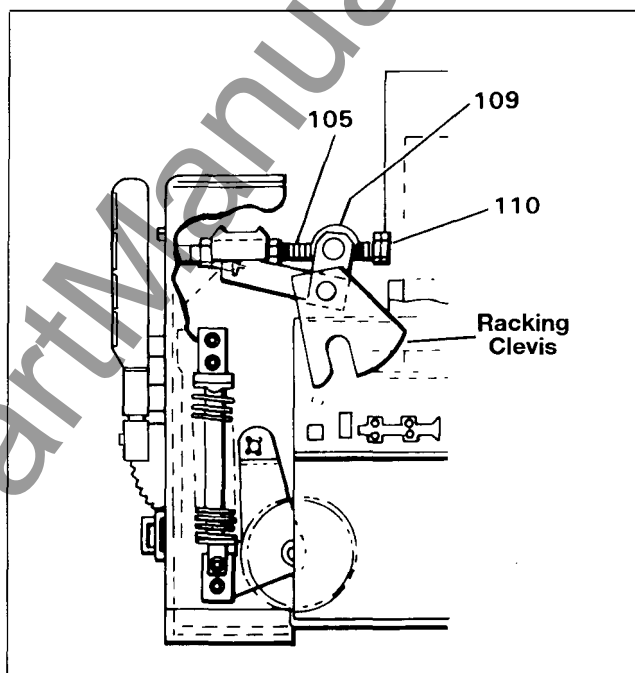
Detail of Typical Racking Mechanism and Drawout Interlock
